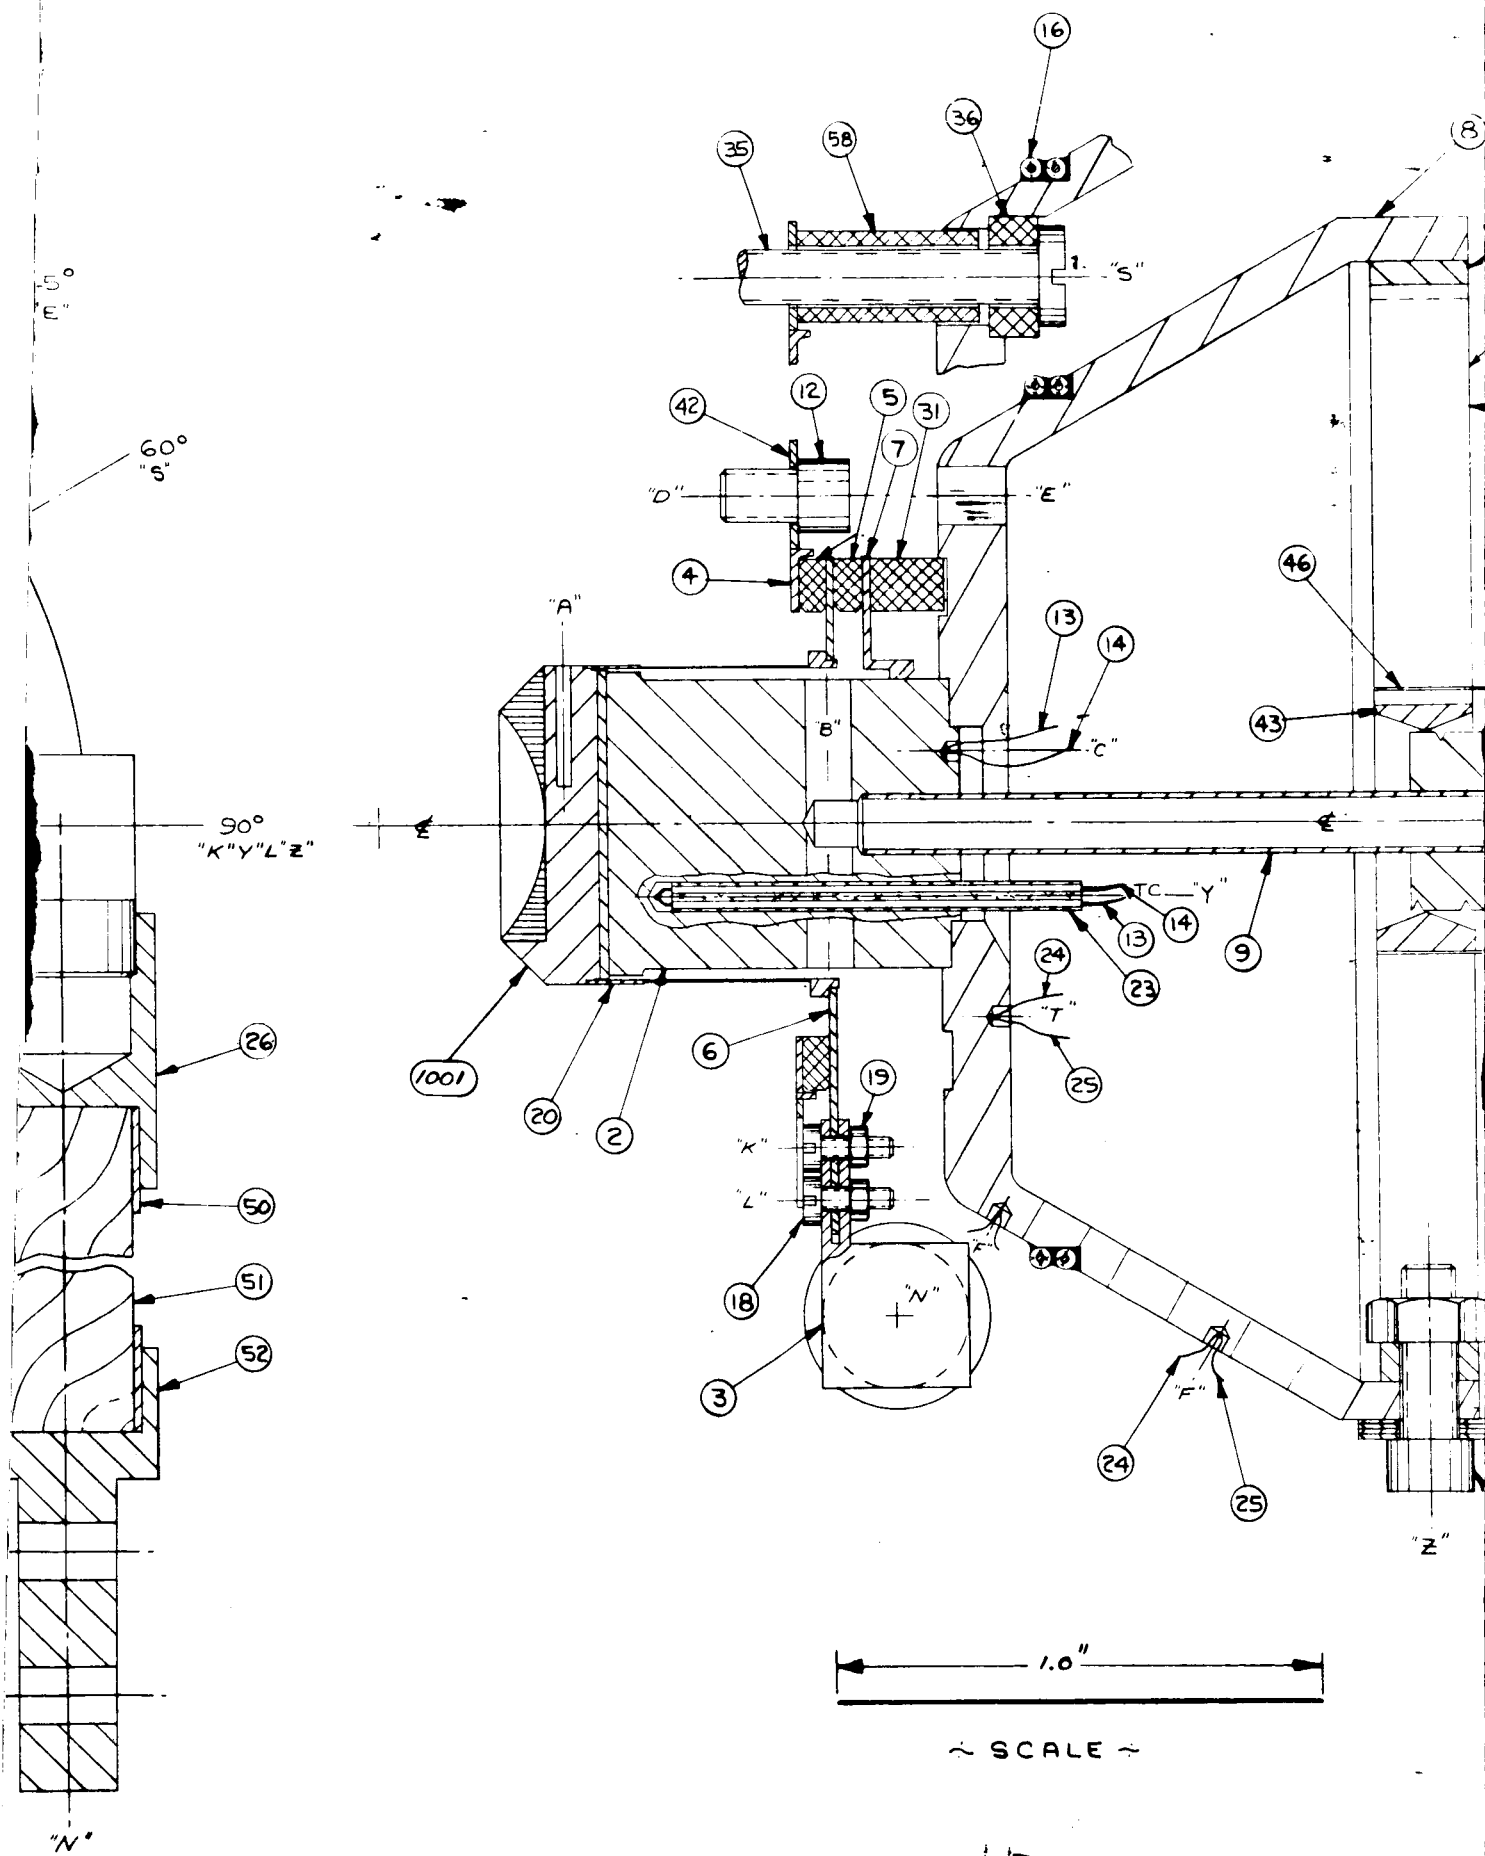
Converter Sleeve Welded to Emitter and Flange.
